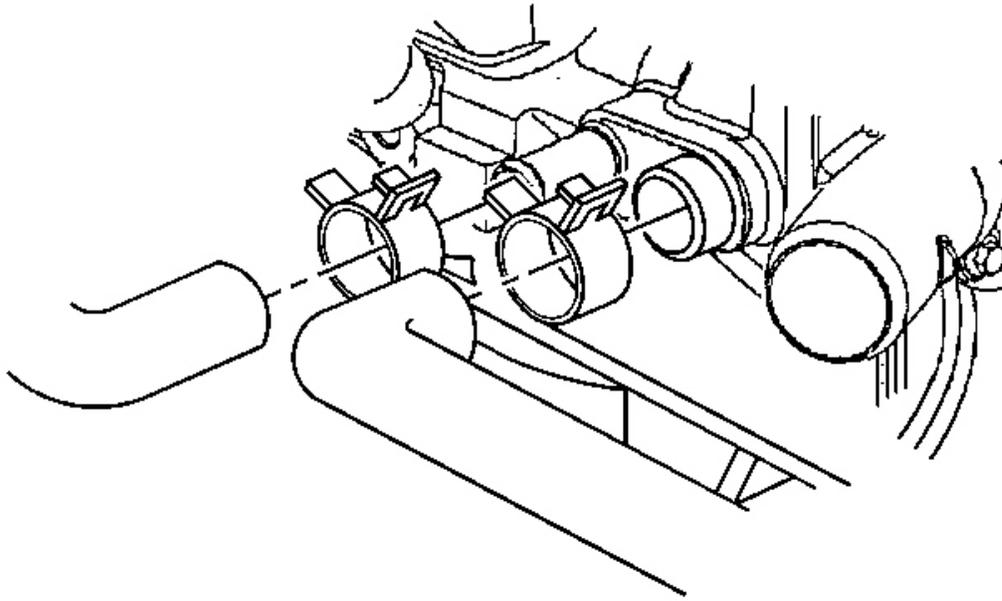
Heater Inlet & Surge Tank Outlet Hoses
